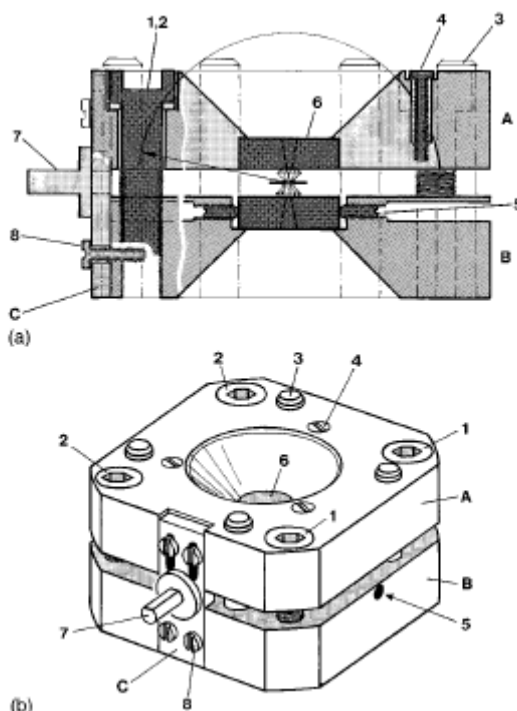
A multilayer cross-sectional view (a) and an axonometric view (b) of the diamond-anvil cell showing: (A) upper platen;(B) lower platen; (C) mounting bracket; (1) right-handed M5 bolts; (2) left-handed M5 bolts; (3) 5-mm-diameter guide pins; (4) M2 parallel alignment screws; (5) M2 radial alignment set screws; (6) Be backing disks; (7) mounting pin; (8) M2 mounting-bracket securing screws. The radius of the hemisphere is indicated by the arrow and the faint sector in (a) [124].
